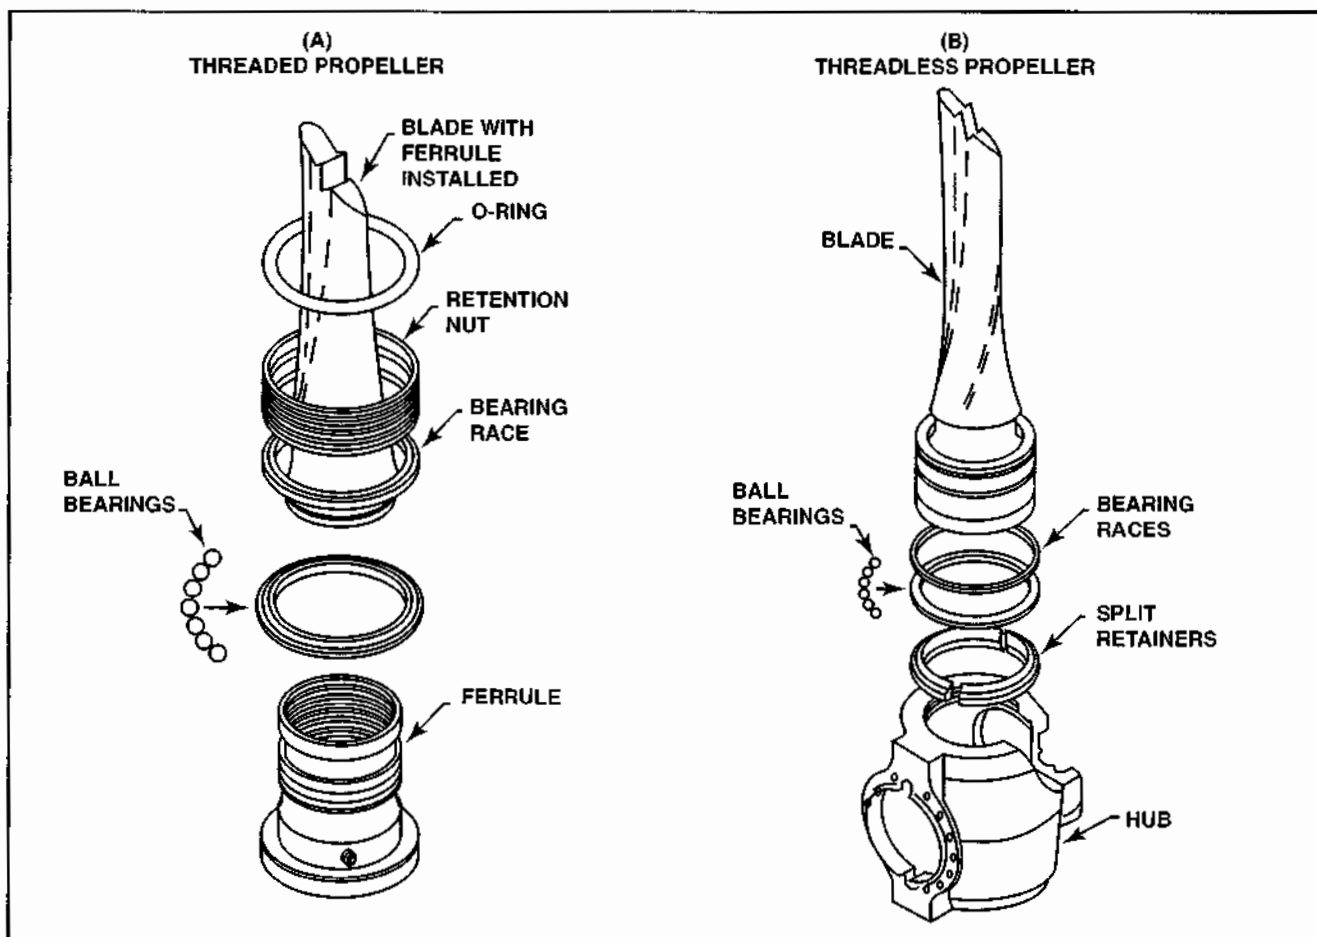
(A) McCauley threaded blades use retention nuts and threaded ferrules to secure the propeller blades to the hub. (B) The modern McCauley design incorporates a split retainer ring to hold each propeller blade in place.
